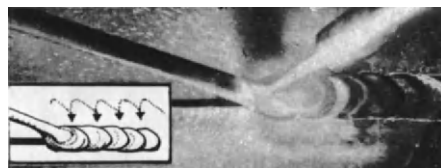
(d) Motion of the filler rods shown by arrows. At the end of each movement the rod is pushed into the weld pool (NZIG).
